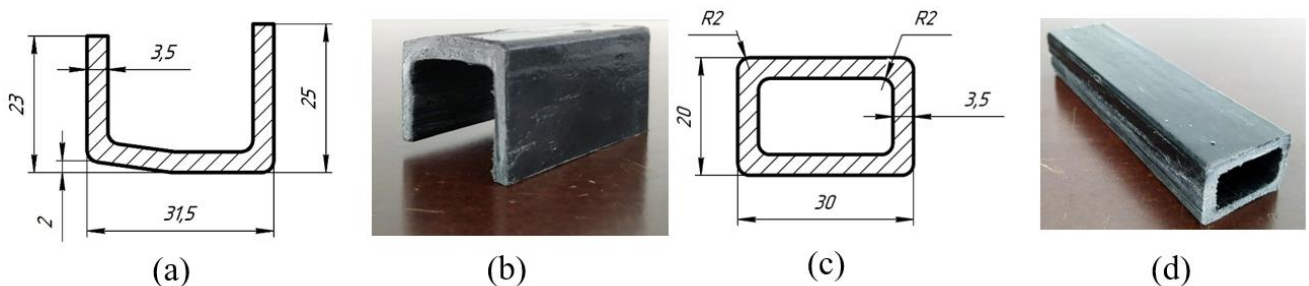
Cross-sectional sketches and pultruded profiles: (a) sketch of the channel (b) pultruded channel, (c) sketch of the tube, (d) pultruded tube.
